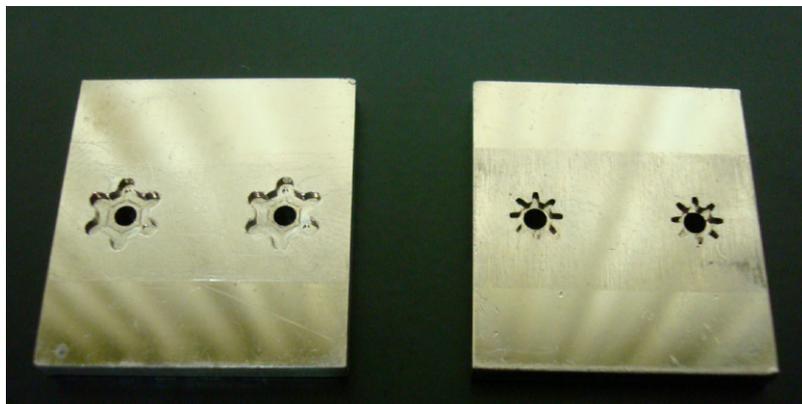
Ni mold inserts for the 6 mm (left) and 4 mm (right) gears.
